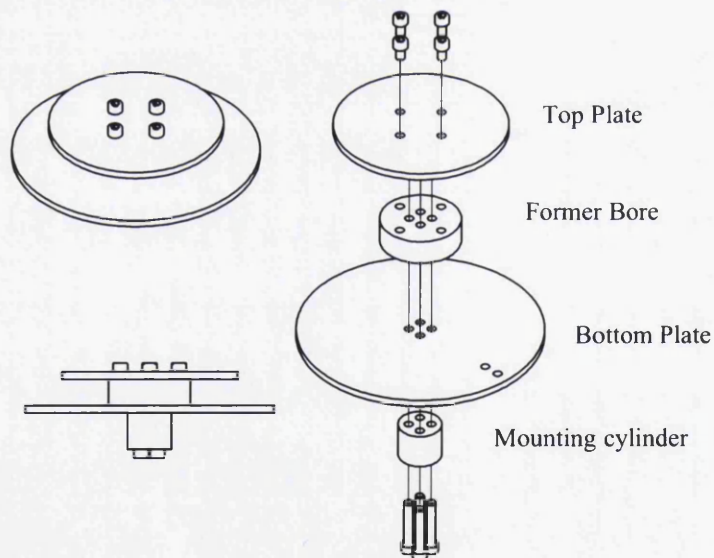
Isometric, exploded and side views of the former used to wind the coils. All holes in the former bore part are tapped to allow the top plate to be removed, the mounting cylinder allows easy mounting in a mechanical chuck. Two holes on the outside edge of the bottom plate allow one end of the coil to be clamped in place once wound
